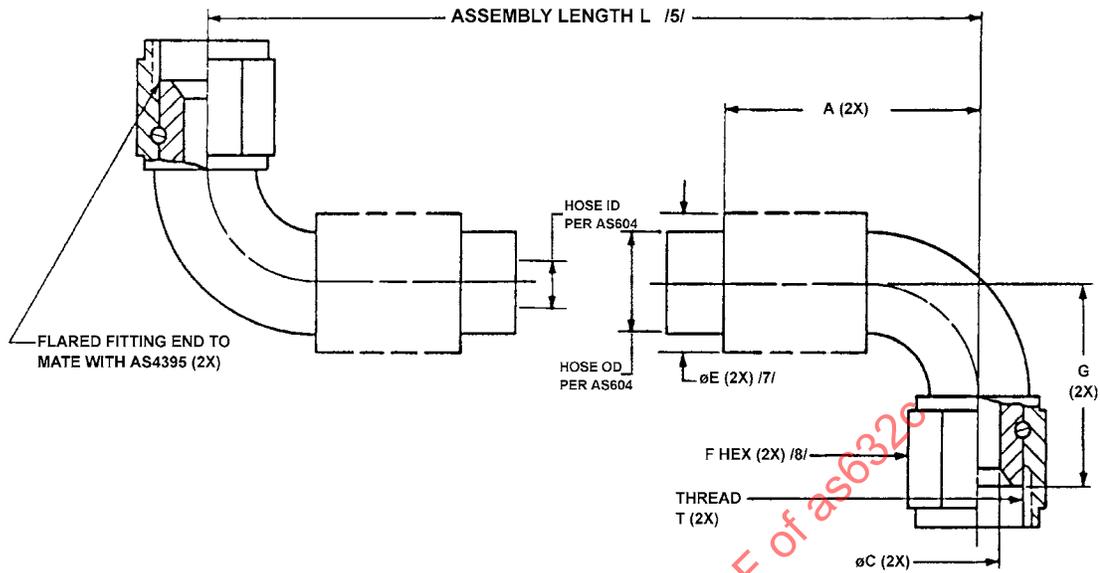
HOSE AND FITTING DIMENSIONS
